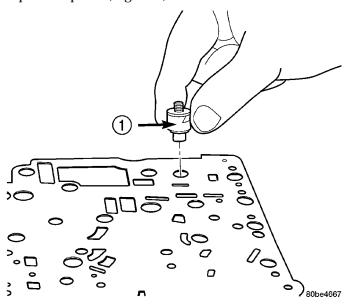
Install Overdrive Clutch (#5) Check Valve
